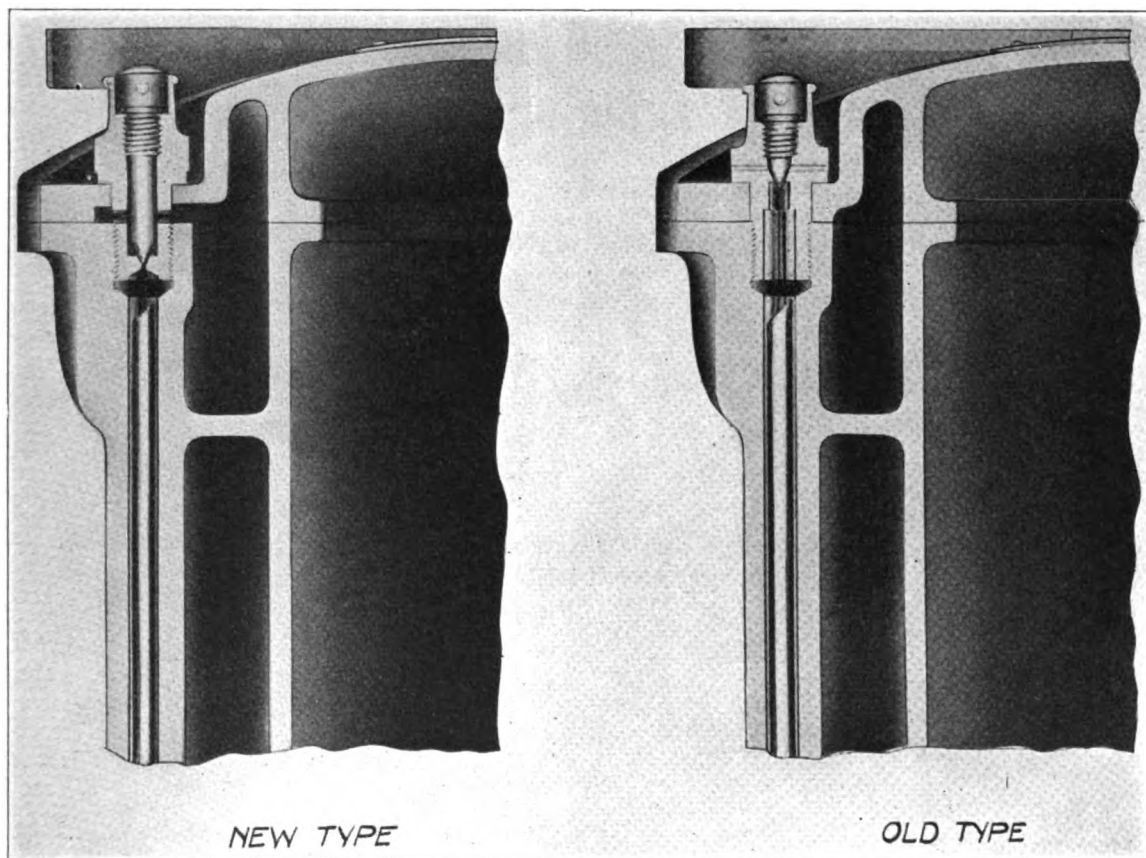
New and old type idling adjustment for Stromberg NA-L5 inverted type airplane carburetors.
